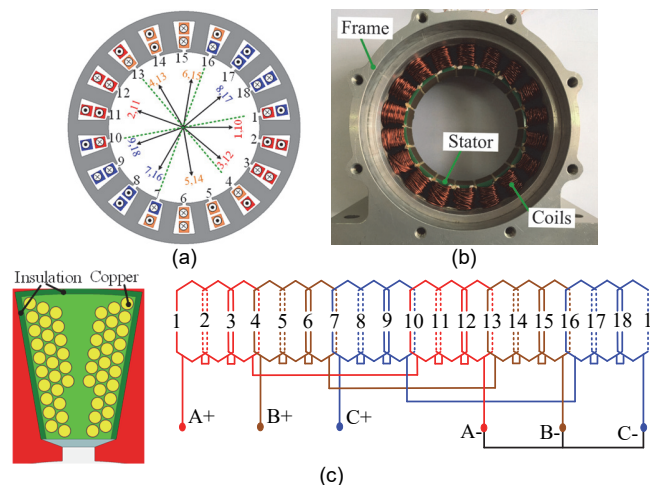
Cross sections and winding configuration of rotary machine. (a) Stator and winding. (b) Stator prototype. (c) Winding arrangement.
